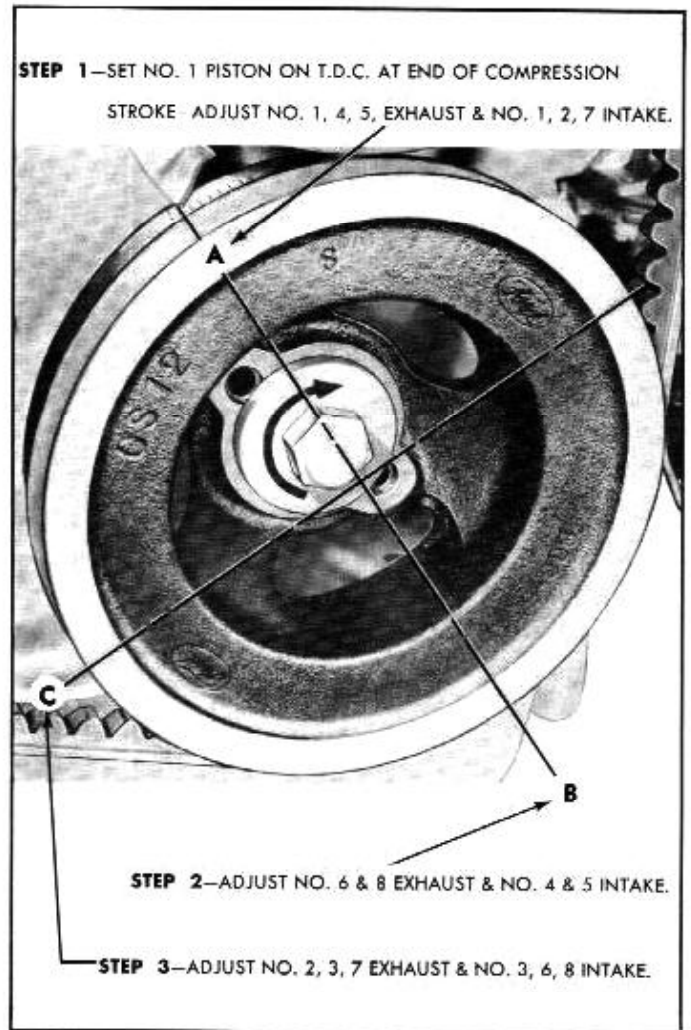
A-125—Quadrant for Preliminary Valve Adjustment
